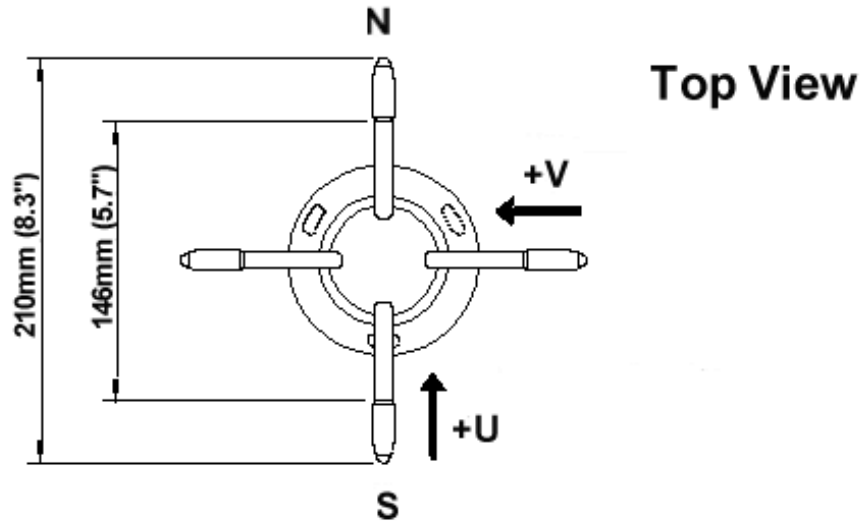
G-045 Issue 2 Anemometer Installation Details
